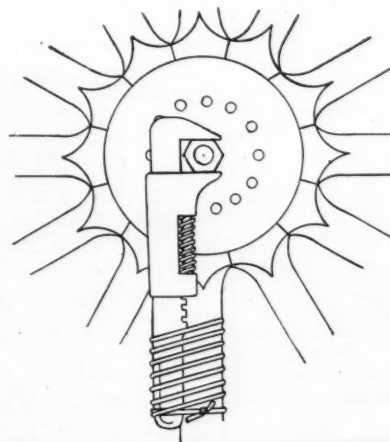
Method for getting home with a sheared axle key suggested by Webster M. Wright
